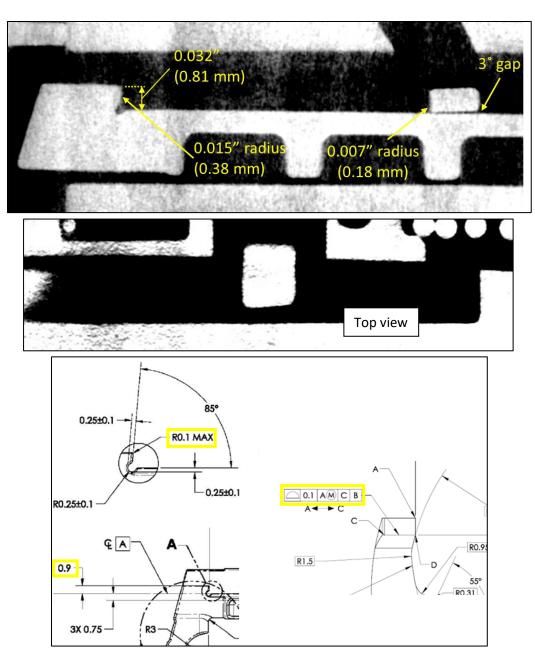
CT scan of striker stop and safety lock (top), top view of same parts (center), Sig Sauer drawings of the same parts (below)
